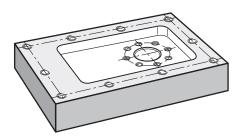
Example workpiece - programming a bolt hole pattern and a row of holes
